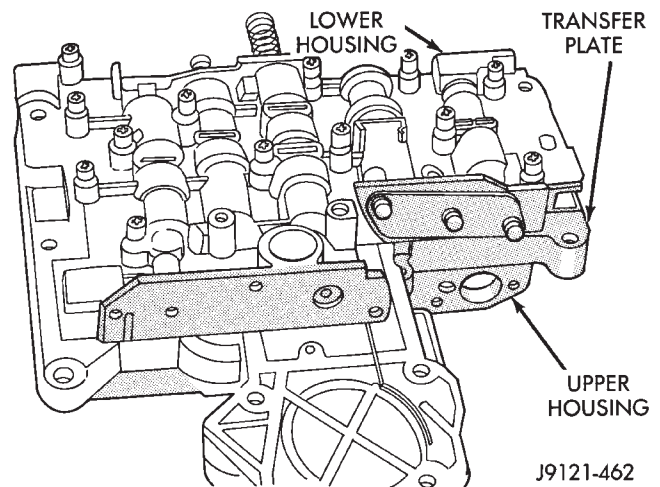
Assembling Upper And Lower Housings Upper Housing Valve And Plug Installation (Figs. 114, 115, 118)
